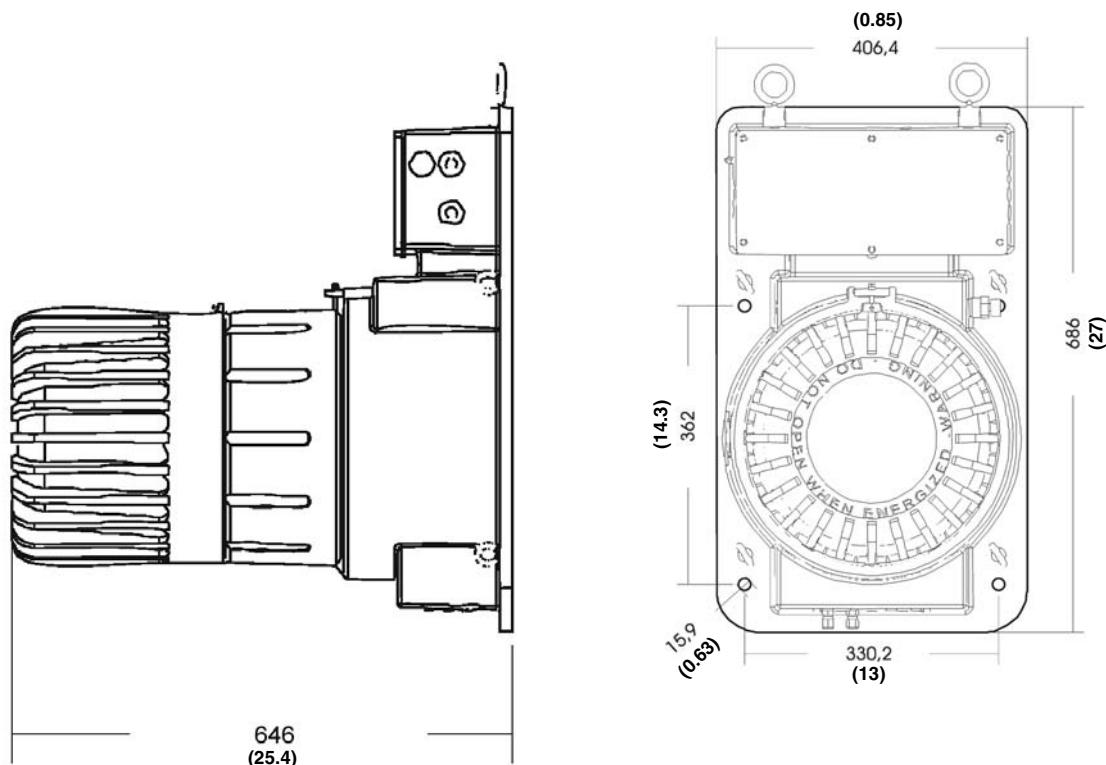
Drill drawing CAT 200 [all dimensions in mm (Inch)]
